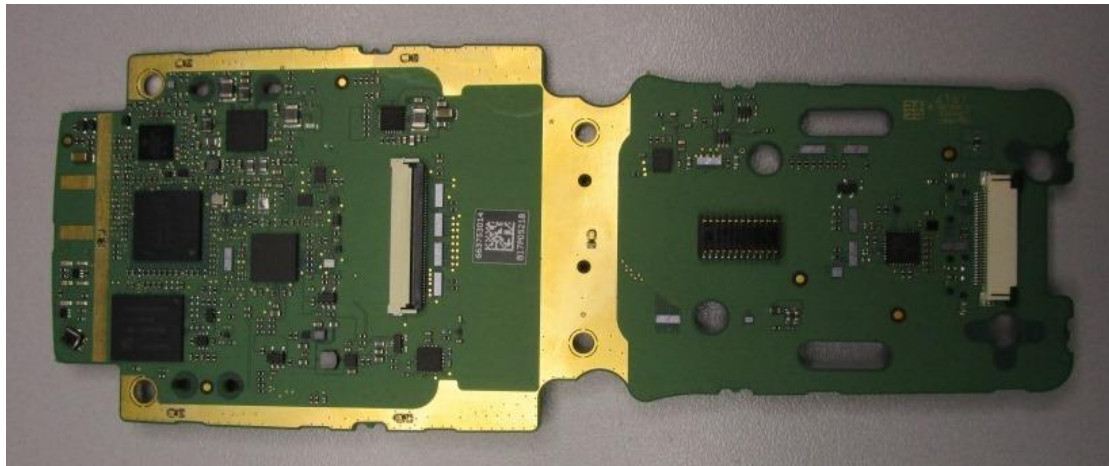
SKORPIO X4 –Display Assembly Top Side
